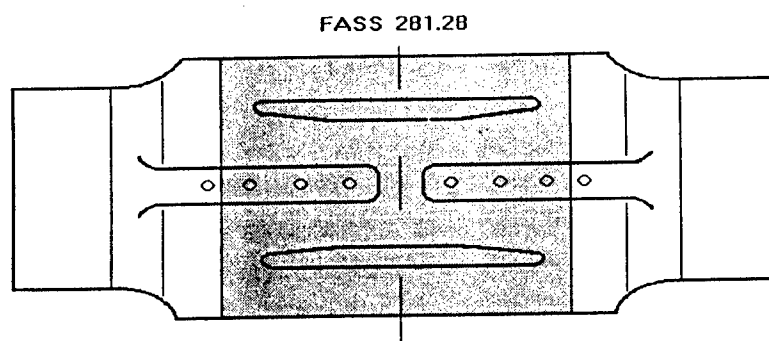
Panel specimen. View onto side representing upper surface of lower wing skin. Boron patch region is shown shaded.
